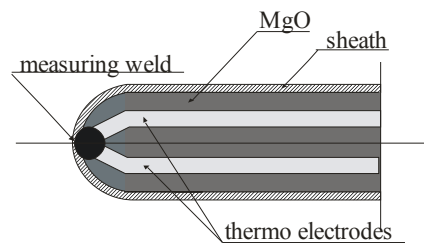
Longitudinal section of the final part of the sheathed thermocouple with the weld welded to the sheath
